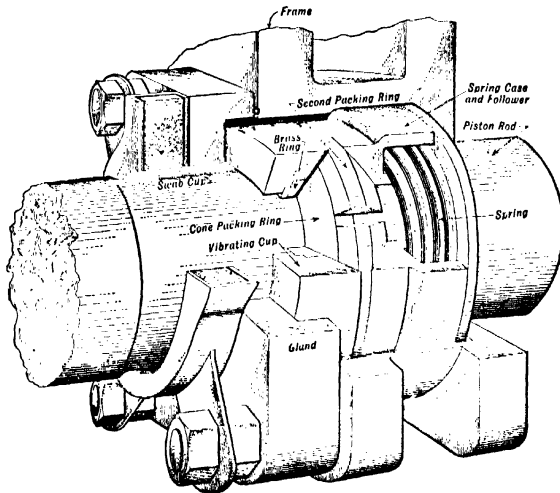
Sullivan Metallic Piston Rod Packing.
